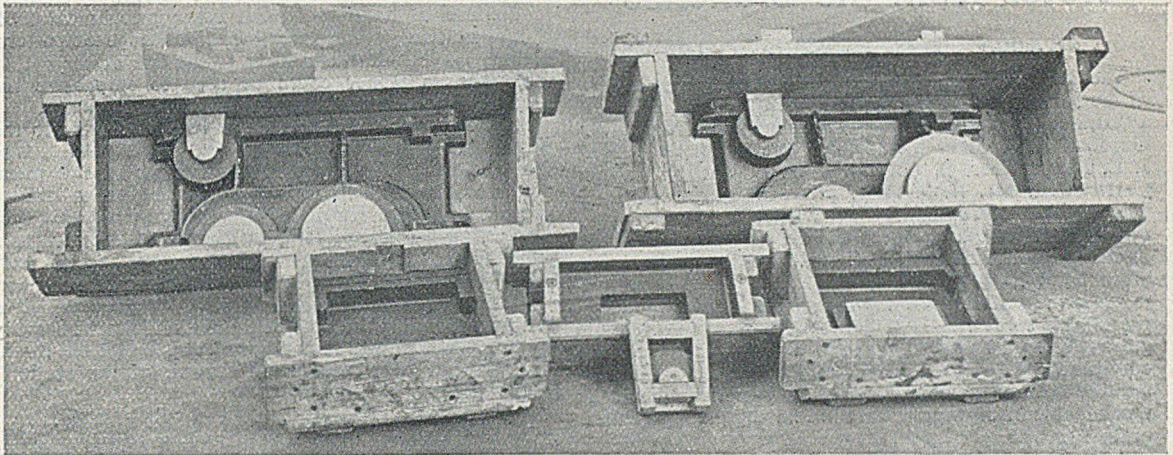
Corebox Equipment complementary to the Gear-case Block Pattern shown in Fig. 14.
